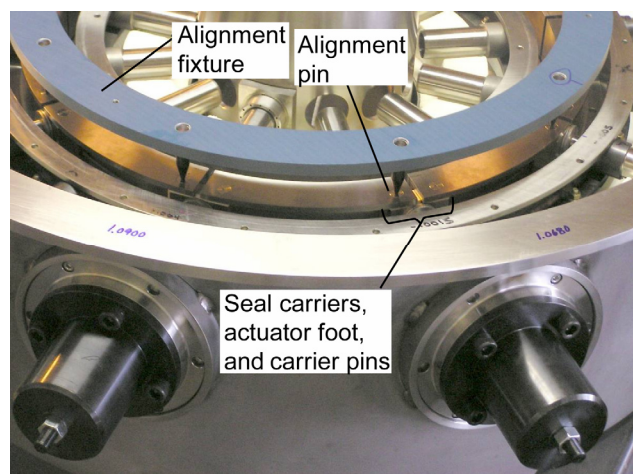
ACC test rig with carrier alignment fixture installed. Note gage pins insert into precision centering holes in carrier pins. Alignment fixture used to set nominal or “home” position for all carrier segments.
